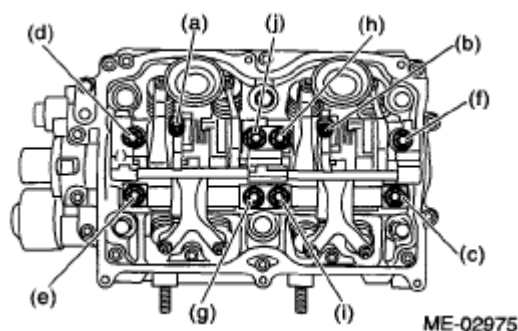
Identifying Valve Rocker Assembly Bolts Removing Sequence
